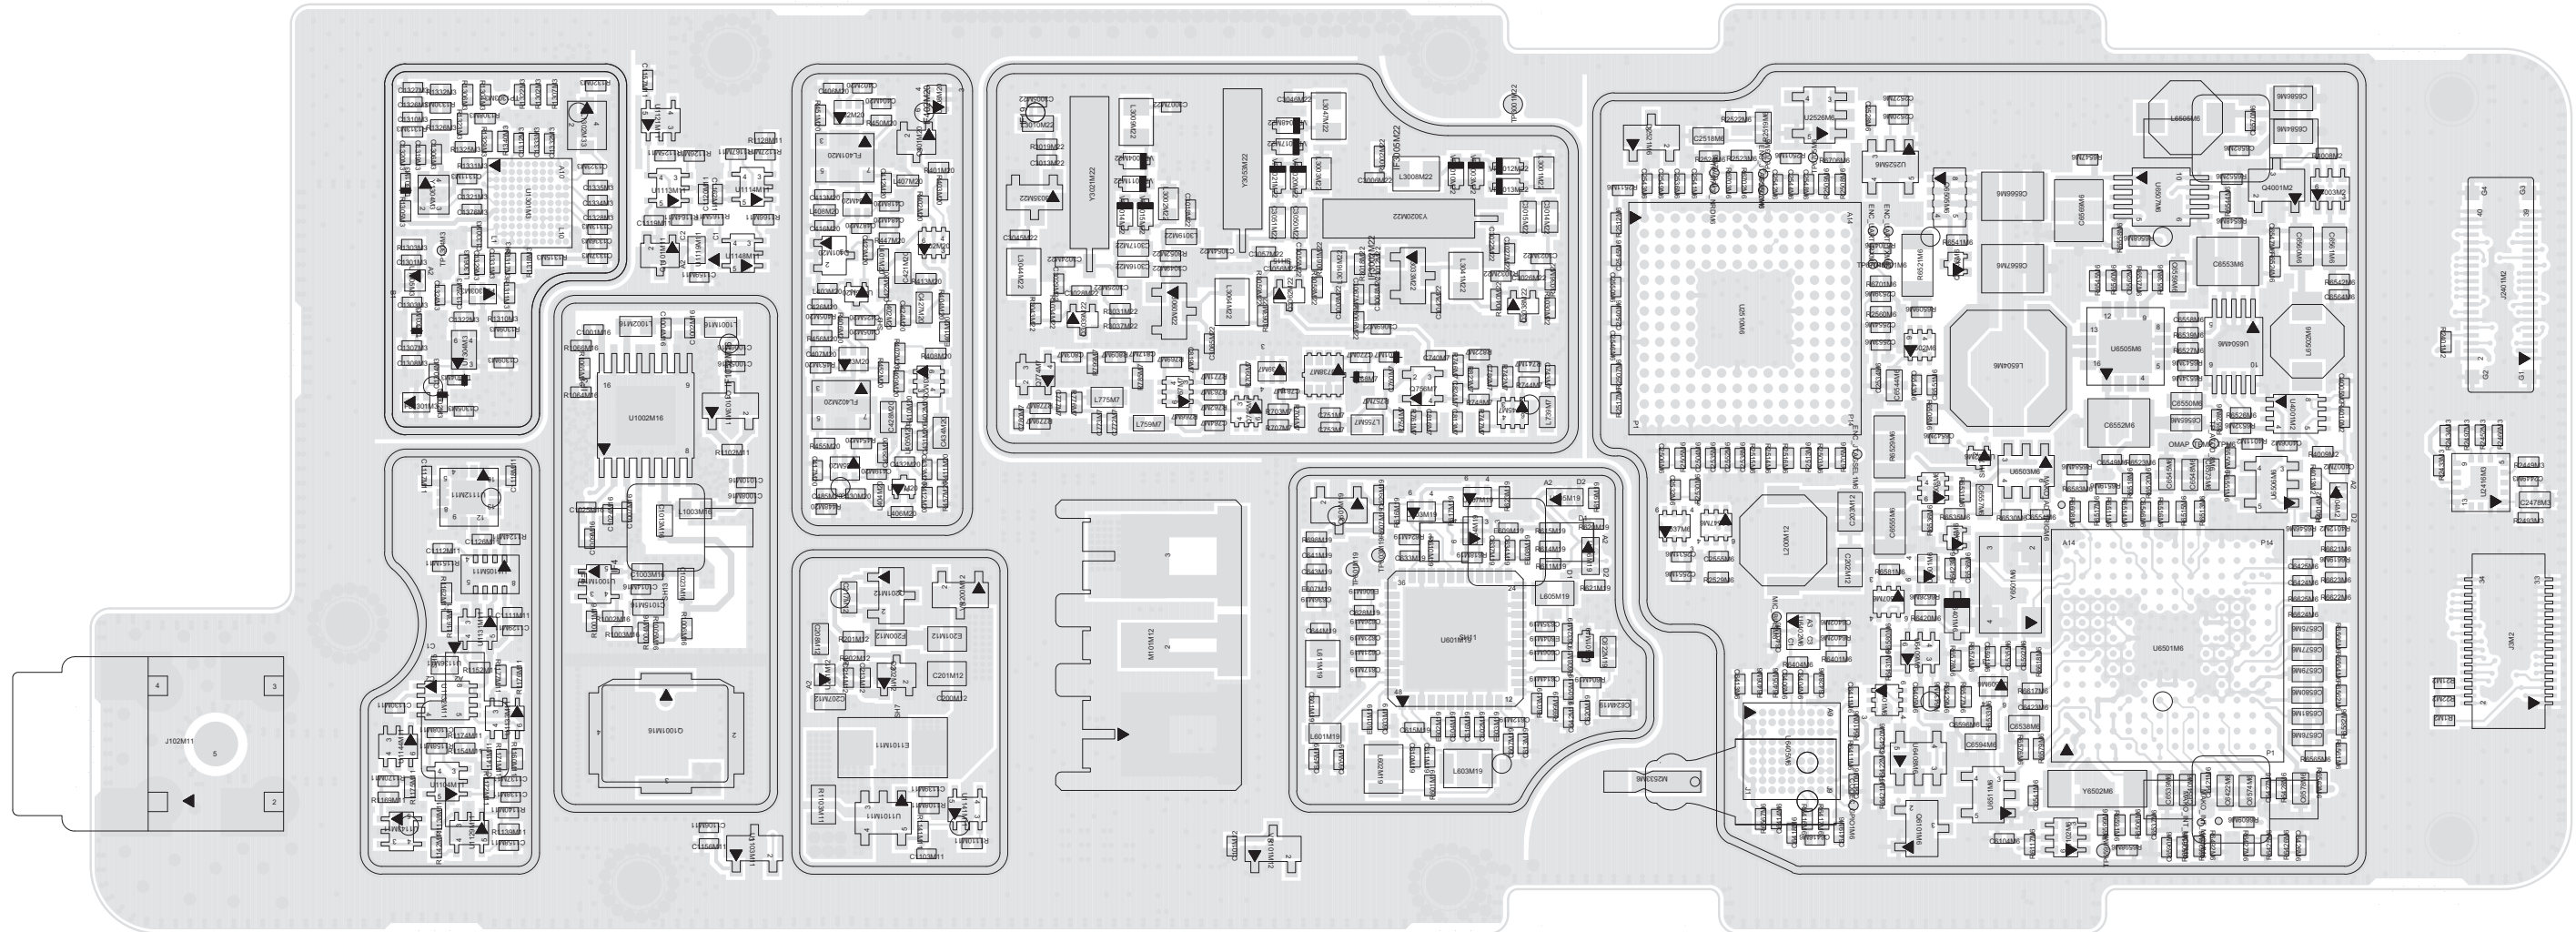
Transceiver (RF) Board Layout – Bottom Side
